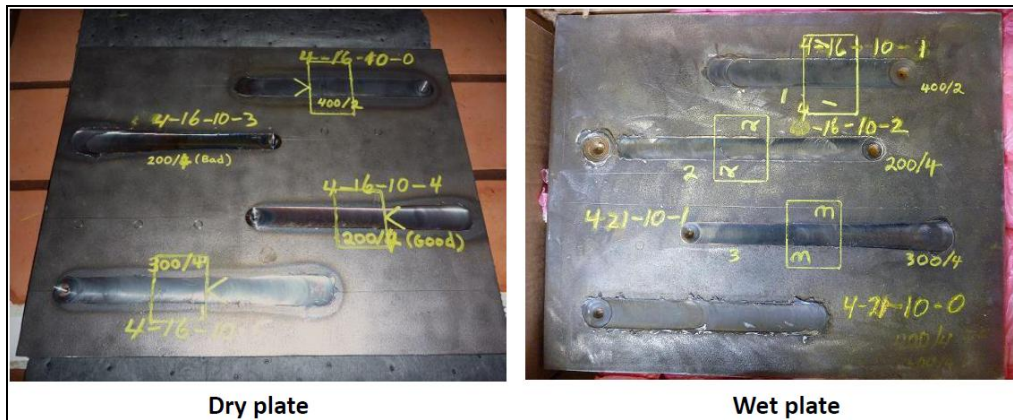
Post-FSP beads on dry and wet plates showing visually defect-free welds. Rectangular marked areas show cut specimen locations for microscopy analysis.
